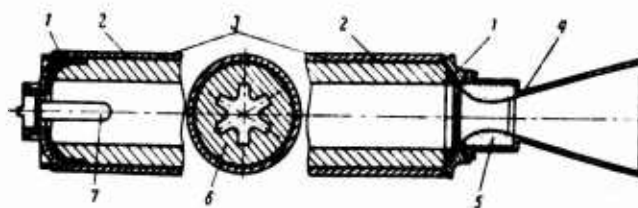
Solid-propellant rocket engine: 1 - armoring covering; 2 - housing; 3 - padding; 4 - nozzle; 5 - nozzle insert; 6 - fuel; 7 - igniter.
